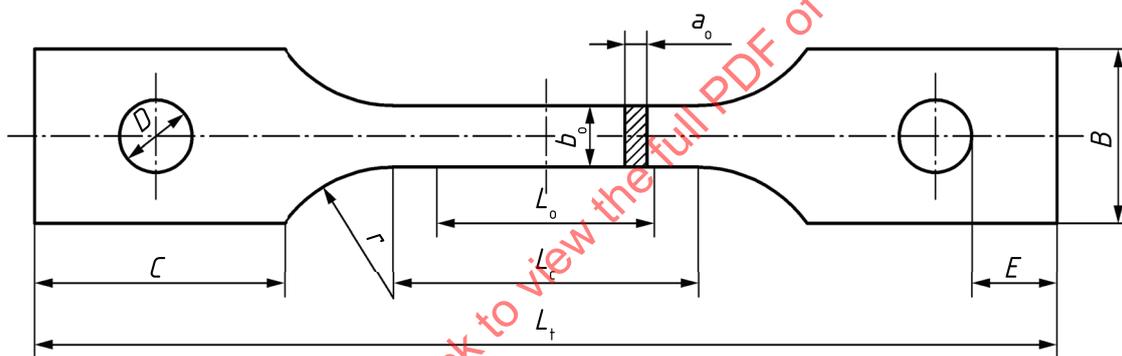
Schematic illustration of a flat test piece and of the dimensions, gripping by pins^{[1][2]}
